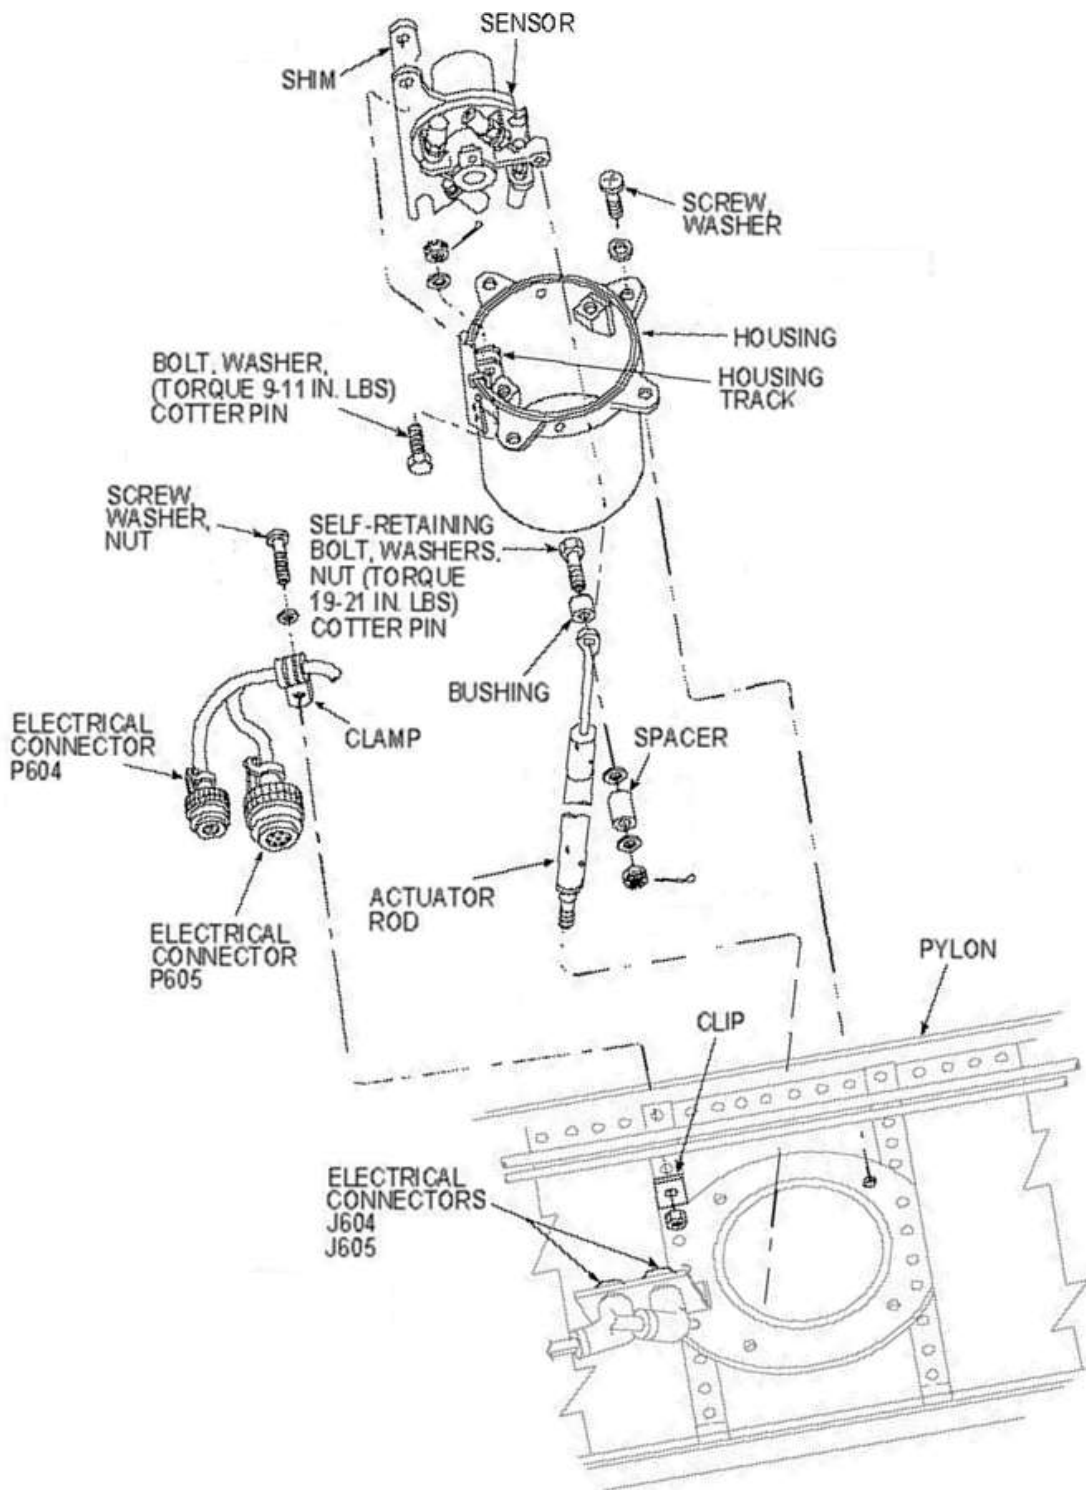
Installation of Position Transmitter/Limit Switch Assembly
